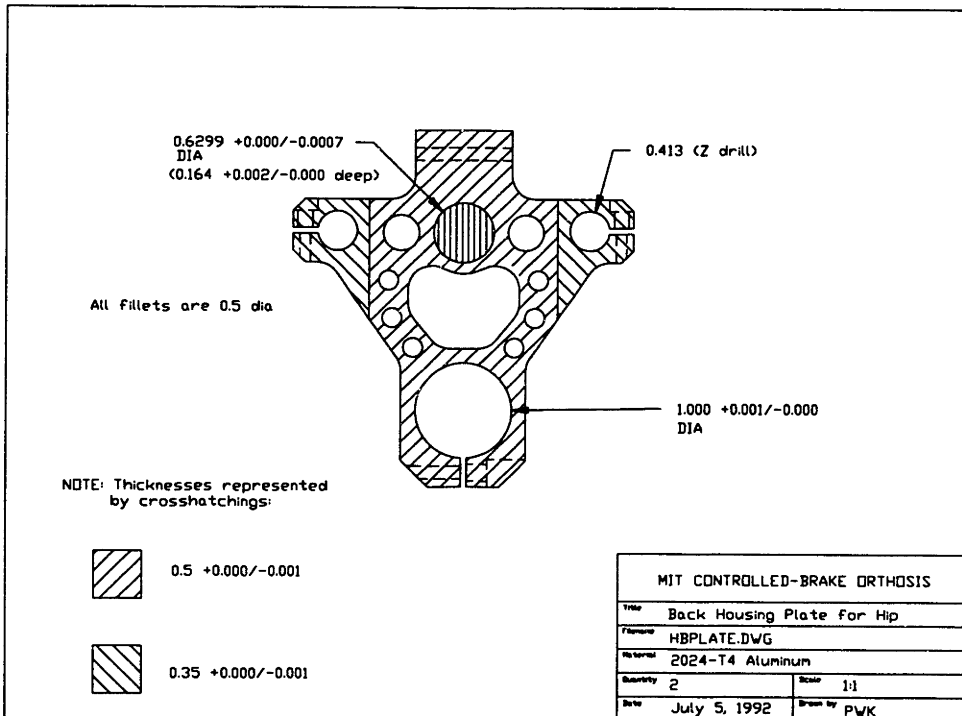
Back plate of hip gear housing (drawing 1 of 2).
